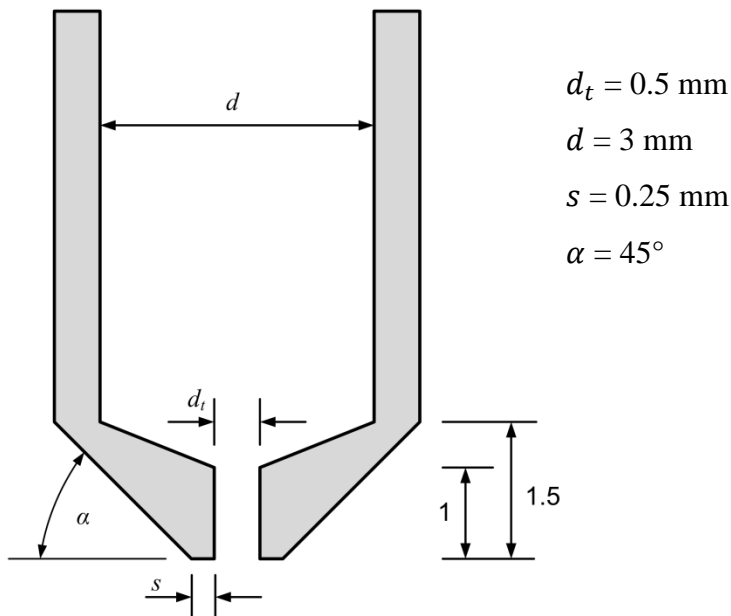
Schematic of the new gauge nozzle and dimensions (in mm).
